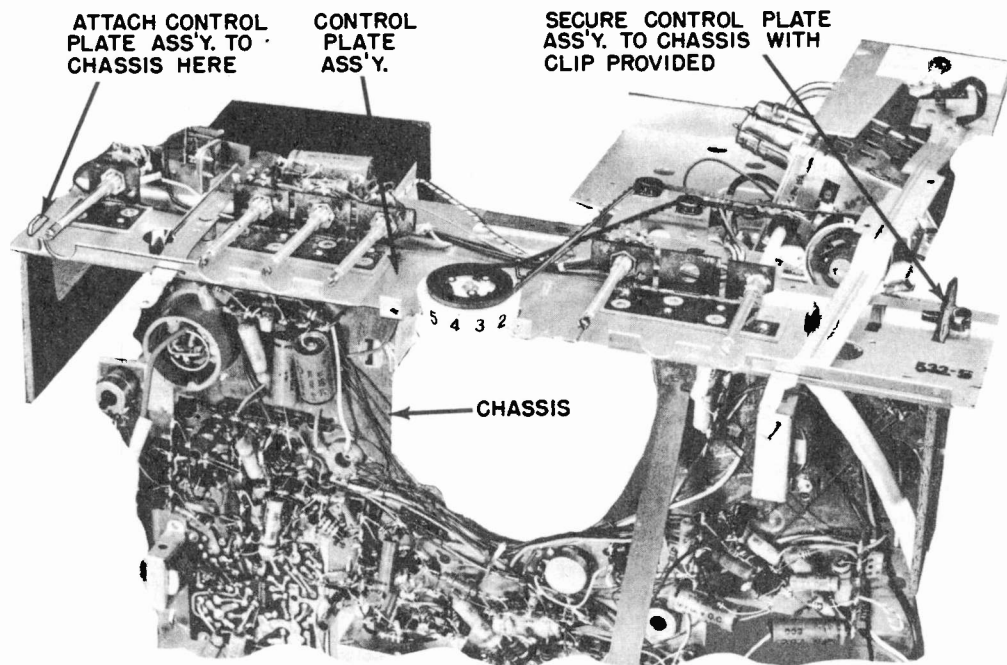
FIGURE A - CONTROL PLATE ASSEMBLY & CHASSIS ATTACHMENT FOR TEST PURPOSES
